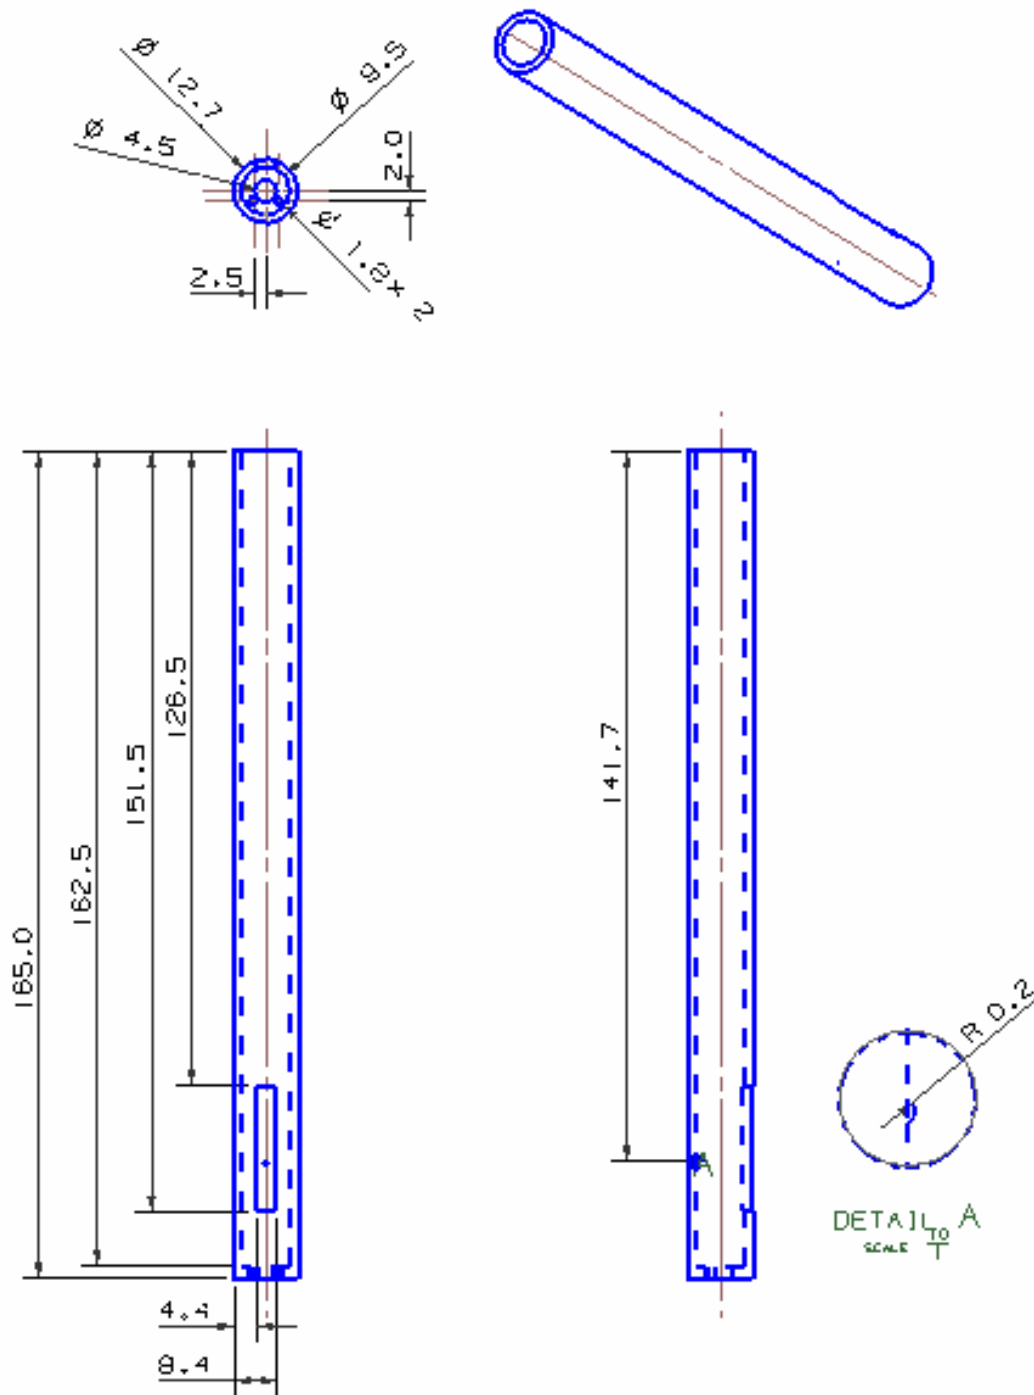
Open Surgery Monopolar Electrical Device Dimensioned Drawings
